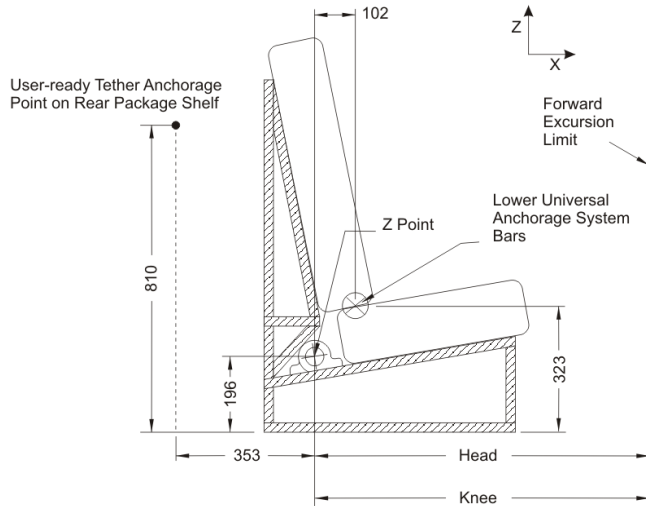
Side View of Standard Seat Assembly Indicating Location of Lower Universal Anchorage System
